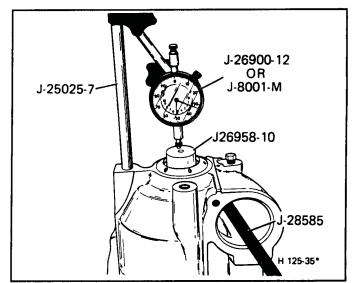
Final Drive End Play Selective Thrust Washer Measurement (680)
